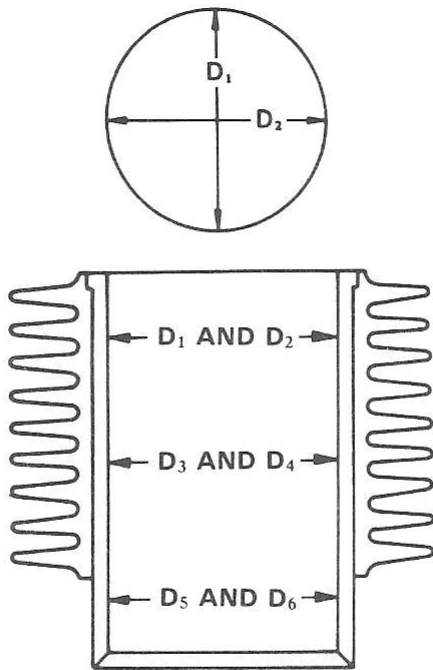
B.16 Cylinder bore measurement points (Sec 10)
